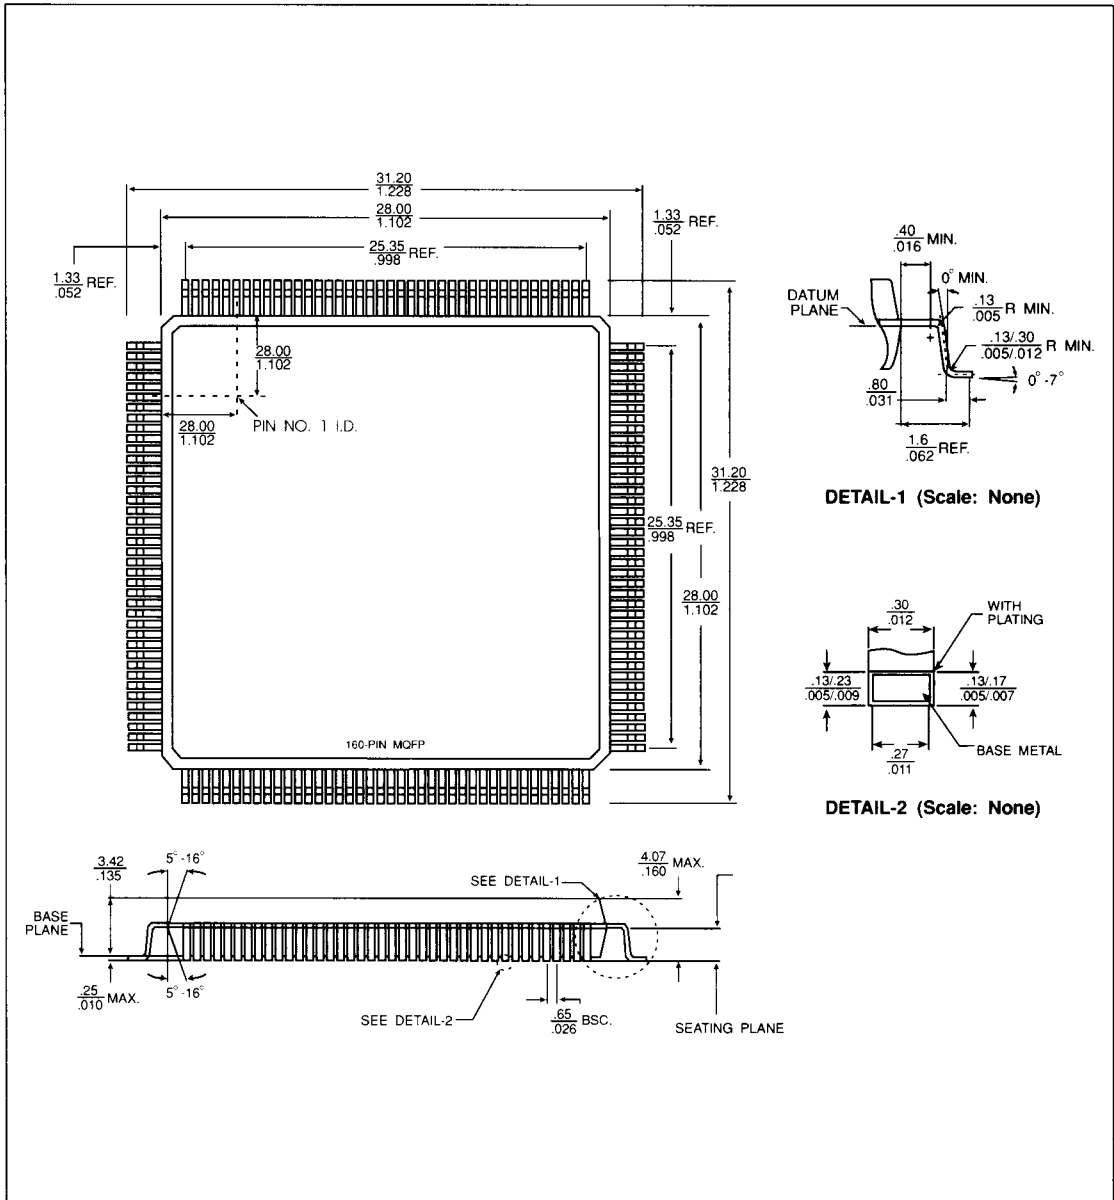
160-PIN MQFP PACKAGE DIMENSIONS
